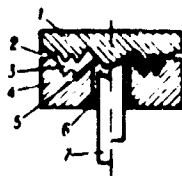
Casting molding with horizontal separation of hemimatrixes (the beginning of the process is shown on the left and its end on the right): 1) Upper hemimatrix; 2) discharge channel; 3) mold cavity; 4) lower hemimatrix; 5) pouring channel; 6) bushing; 7) piston.
